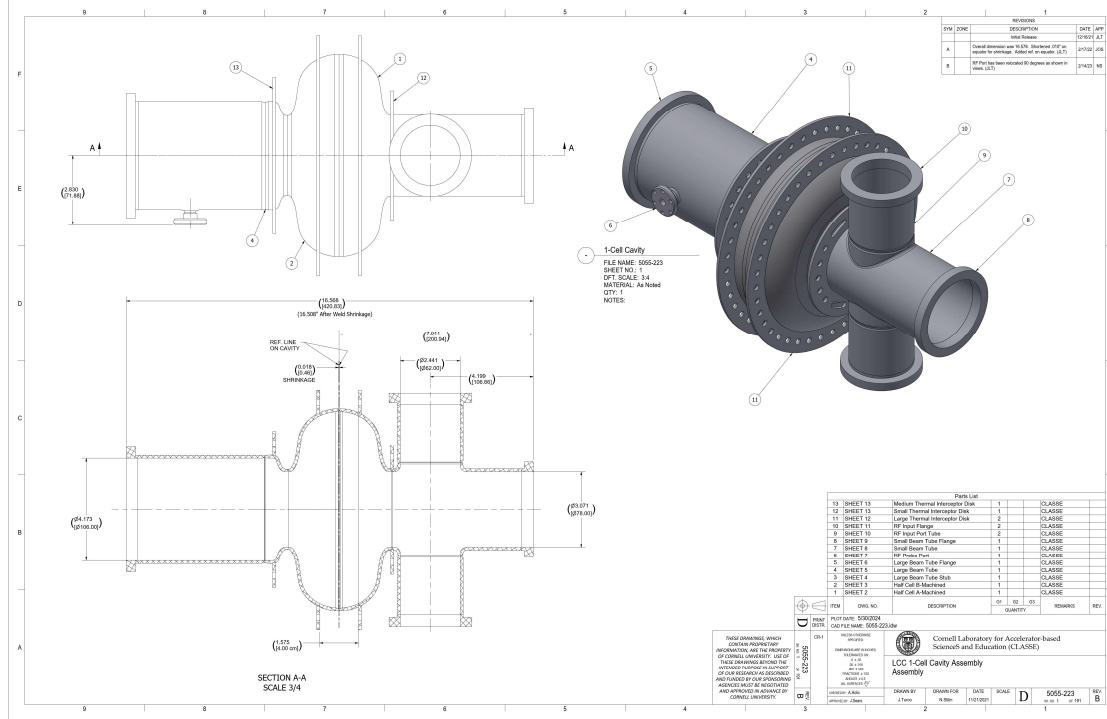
First page of the technical drawing sheets for the conduction-cooled cryomodule project. A print of the LCC1-1 CAD model is seen on the right, while 2D drawings with various dimensions called out are on the left.
